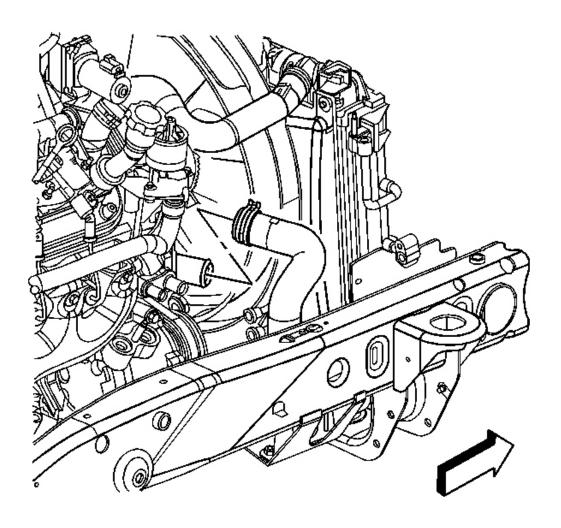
View Of Outlet Hose Courtesy of GENERAL MOTORS CORP.
